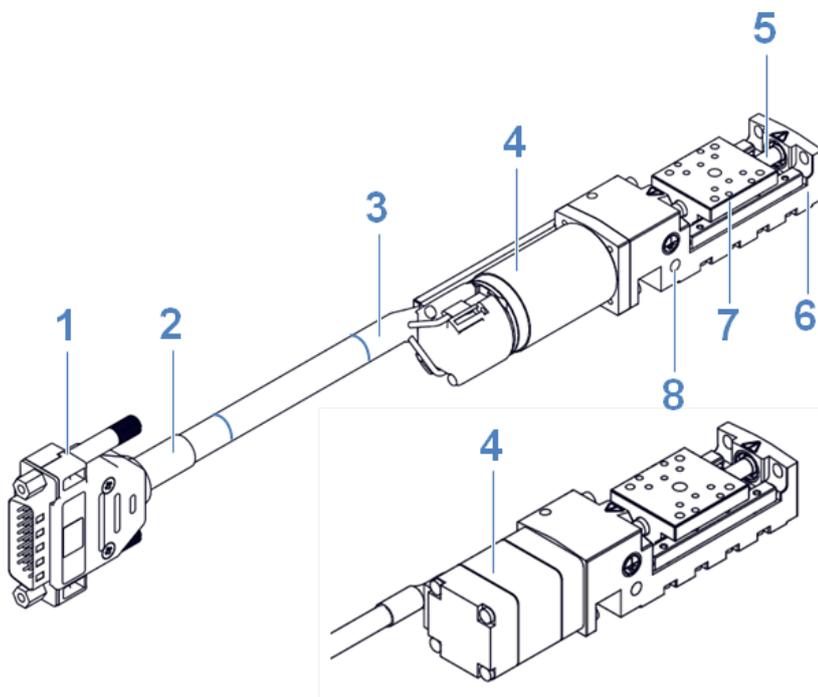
Parts of the L-402: above: L-402.10DD, below L-402.10SD (detail)
